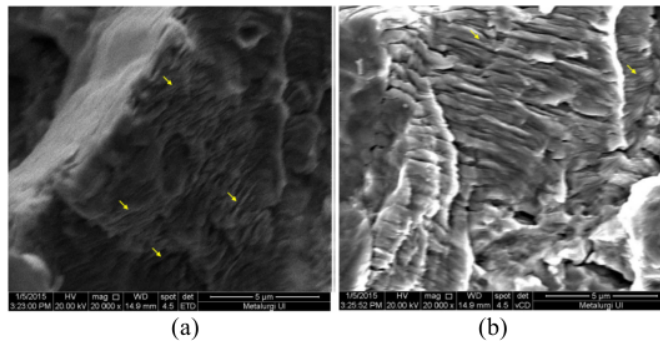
Striation on the specimen Fracture surface on specimen with SDH 3.0 mm; at the hole zone (a), at hole edge(b)
